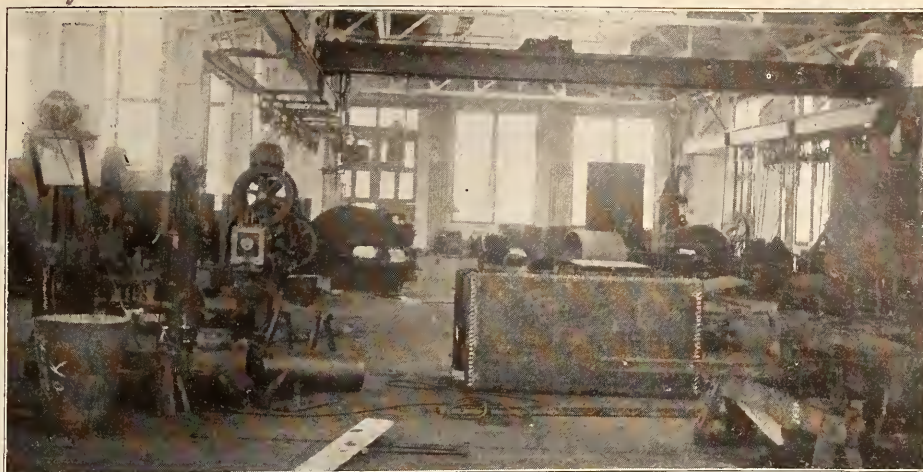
MACHINE BAY IN BOILER SHOP—C. & E. I. R. R.
